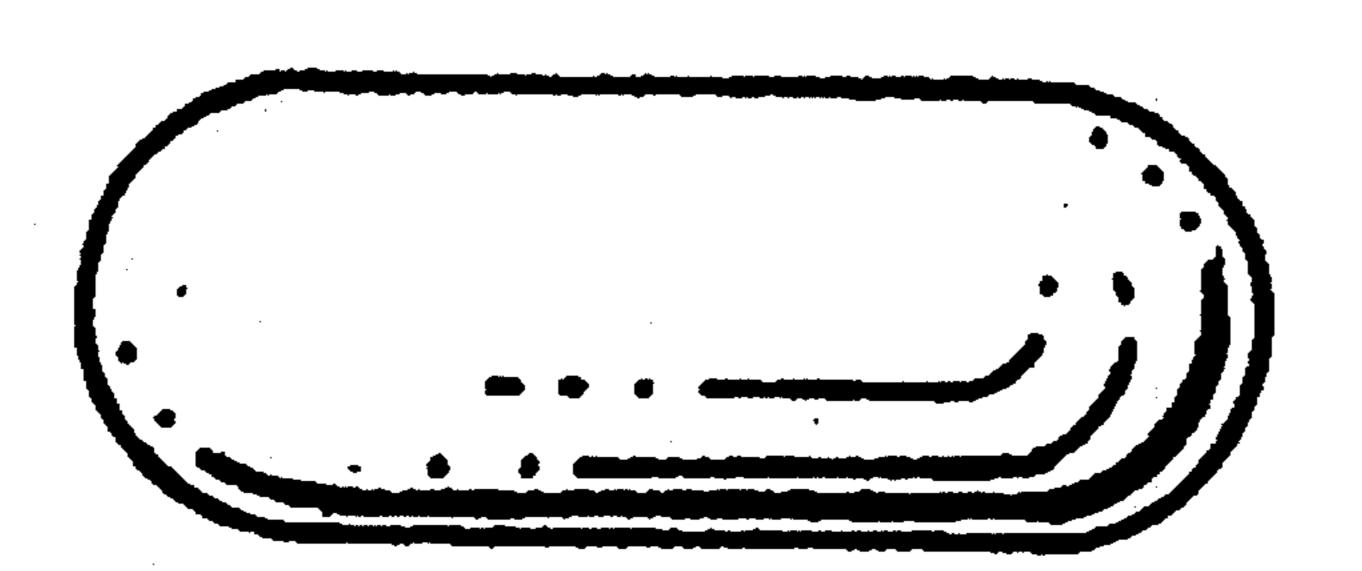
is a plan view of the combined cutting and piercing tool for opening a caulking tube showing my new design;
